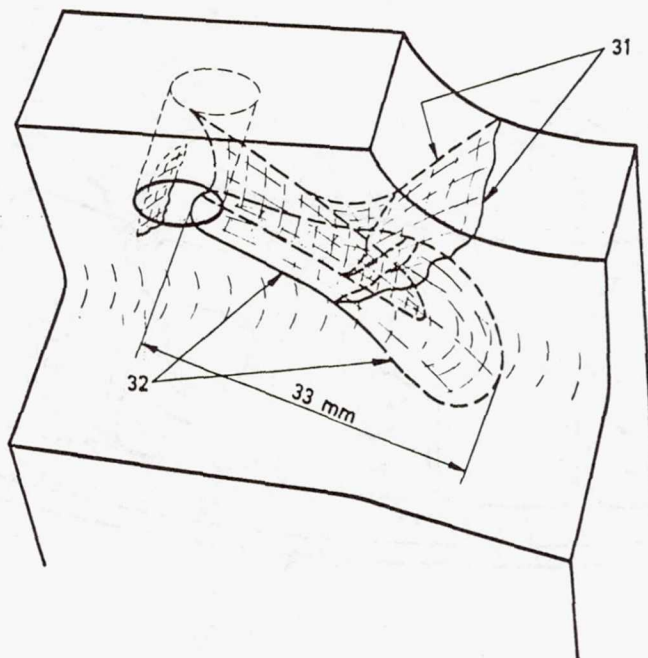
Details of the cracked specimen A<sub>3</sub>.
